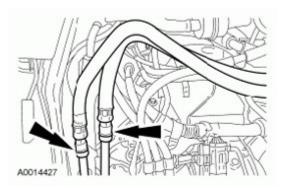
Locating Auxiliary Heater Hoses Courtesy of FORD MOTOR CO.
